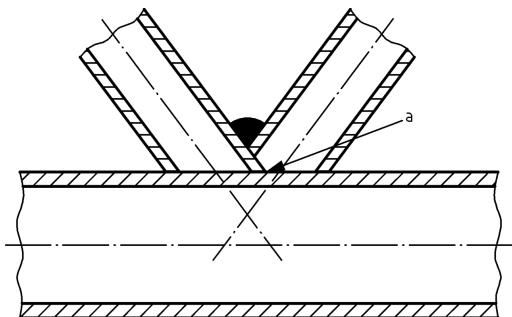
Weld preparation and fit-up - Fillet welds in square or rectangular hollow section brace to chord joints
